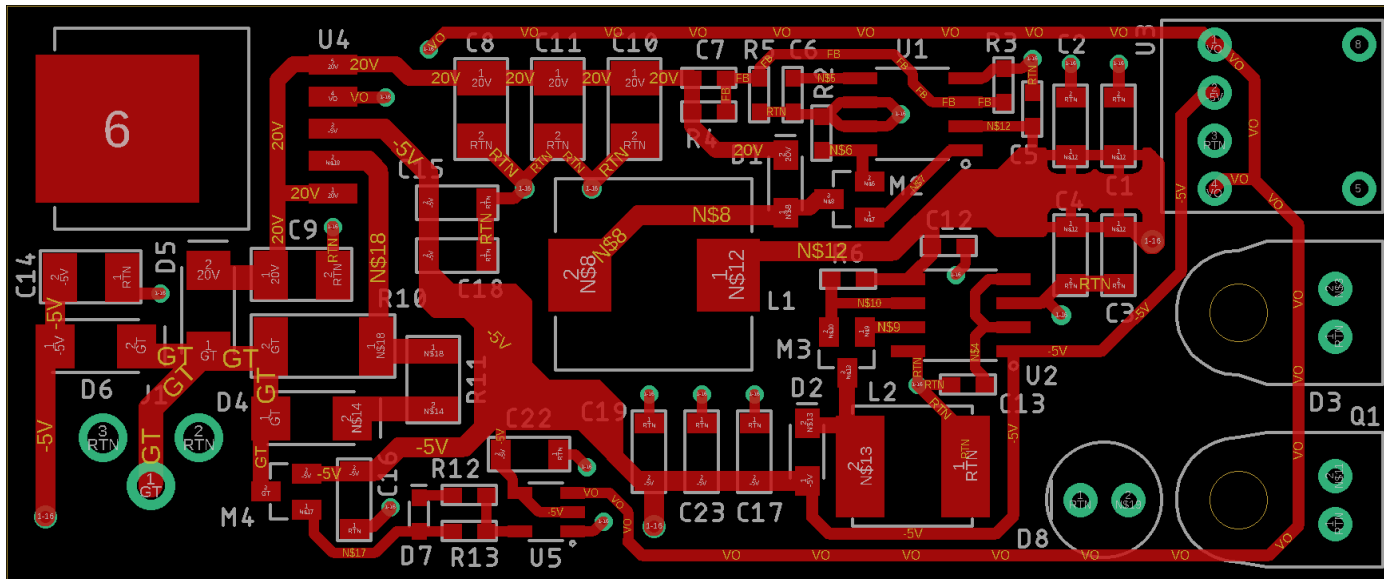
Top copper and silkscreen printed circuit board (PCB) layers of the battery-powered gate-driver design (scale: 2.5:1)
